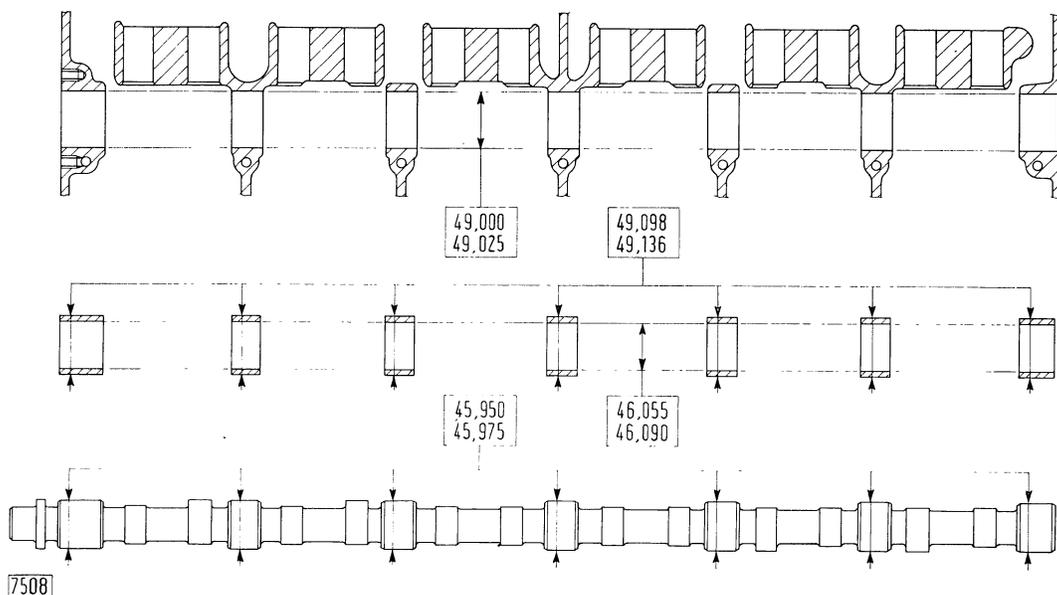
Camshaft, Bearing and Housing Dimensions
